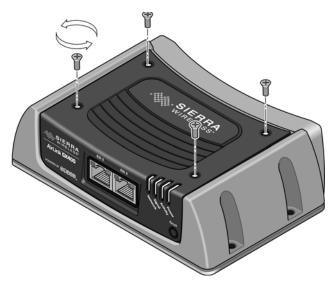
Removing the screws (Dual Ethernet X-Card installed)
